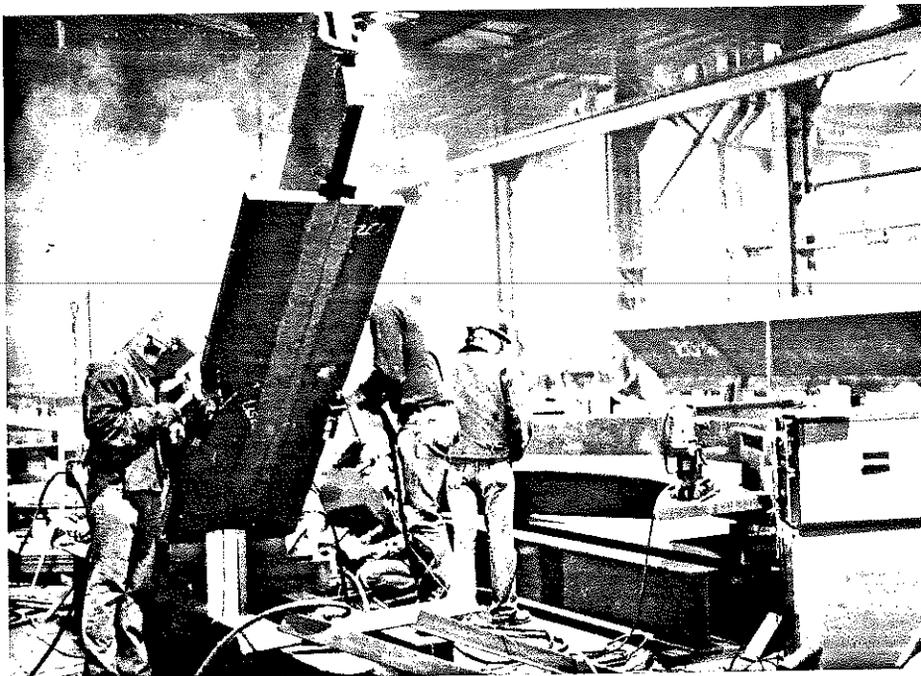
Concurrent Stiffener-to-Flange Welding with Transducers Located Opposite the Welds on the Backside of the Flange (Note the AEWL Located in the Right Corner of the Photograph).
